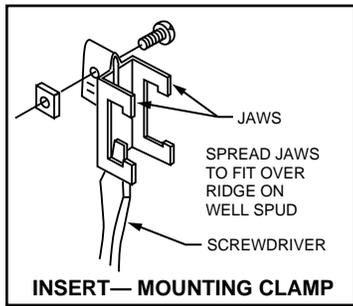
Mounting L6008A Bulb in immersion well using retainer clamp.
